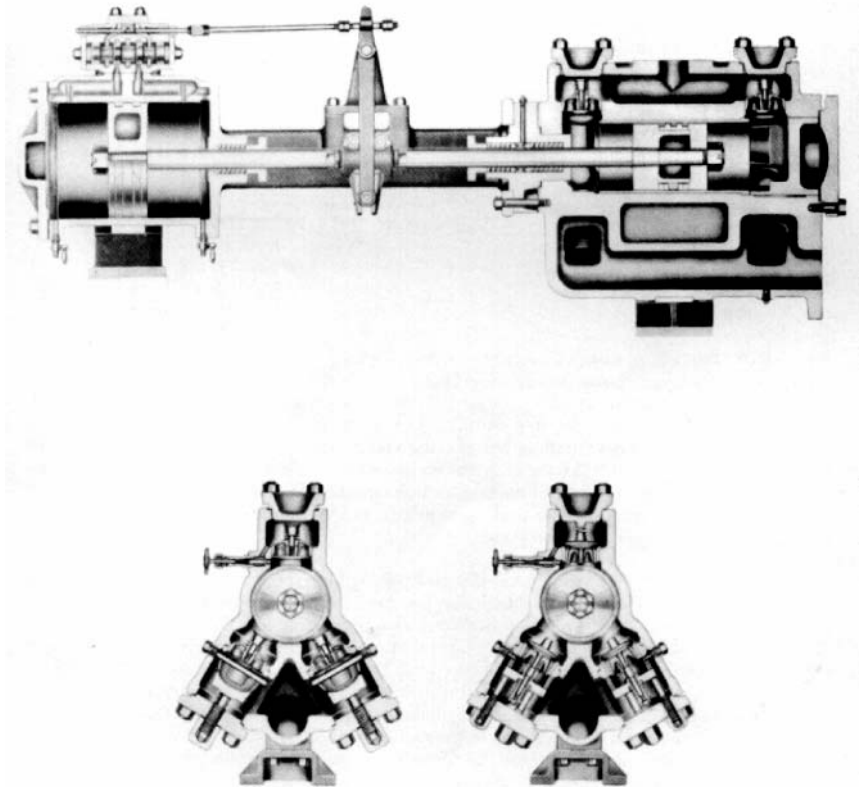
End views of close-clearance liquid end pump, showing disk valve assembly and wing valve assembly (Flowsolve Corporation)
